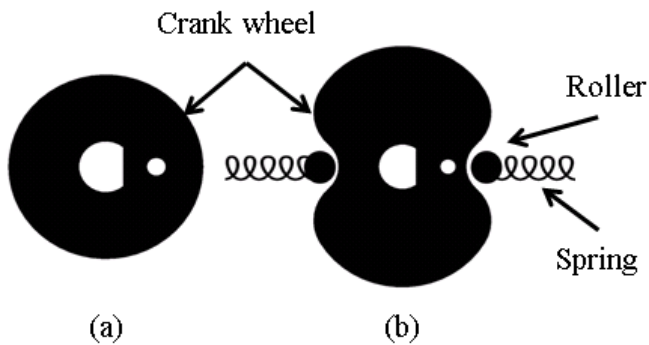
The design of the crank wheel (a) Previous crank wheel (b) New crank wheel.
